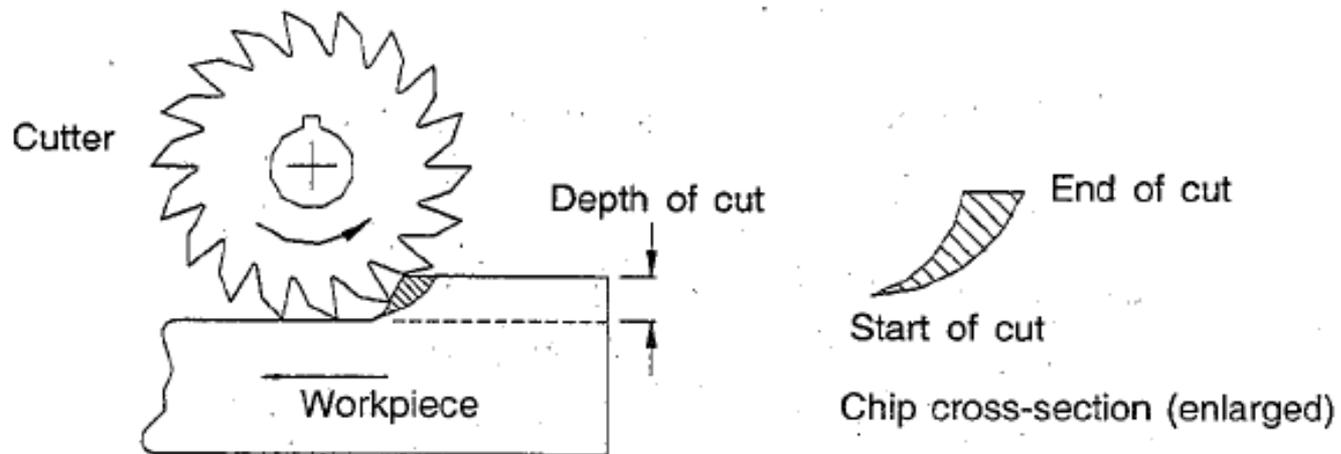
Up milling operation and the chip cut by a cutter tooth.
